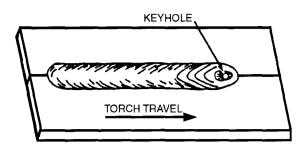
Keyhole Technique for Plasma Arc Welding
